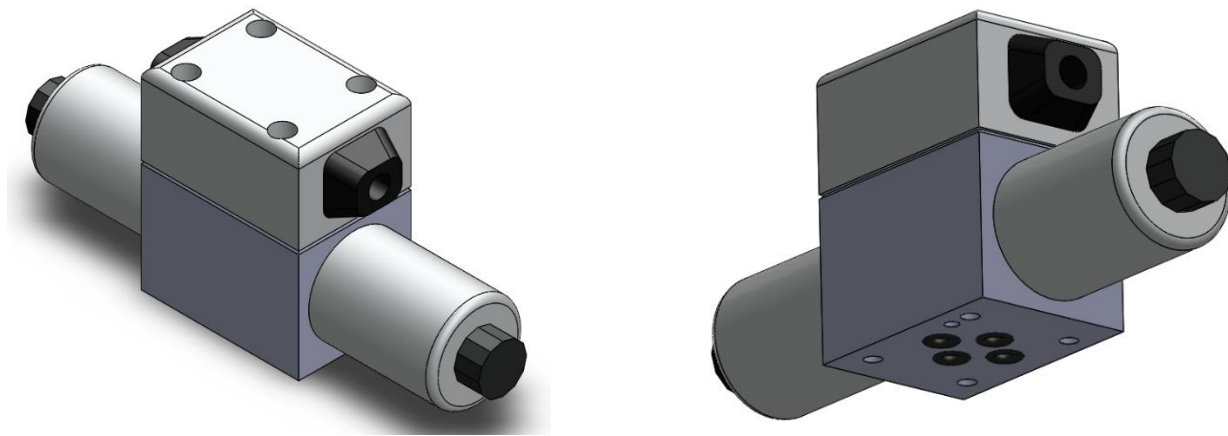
Solenoid Four-Way Directional Control valve (a) top view (b) bottom view
